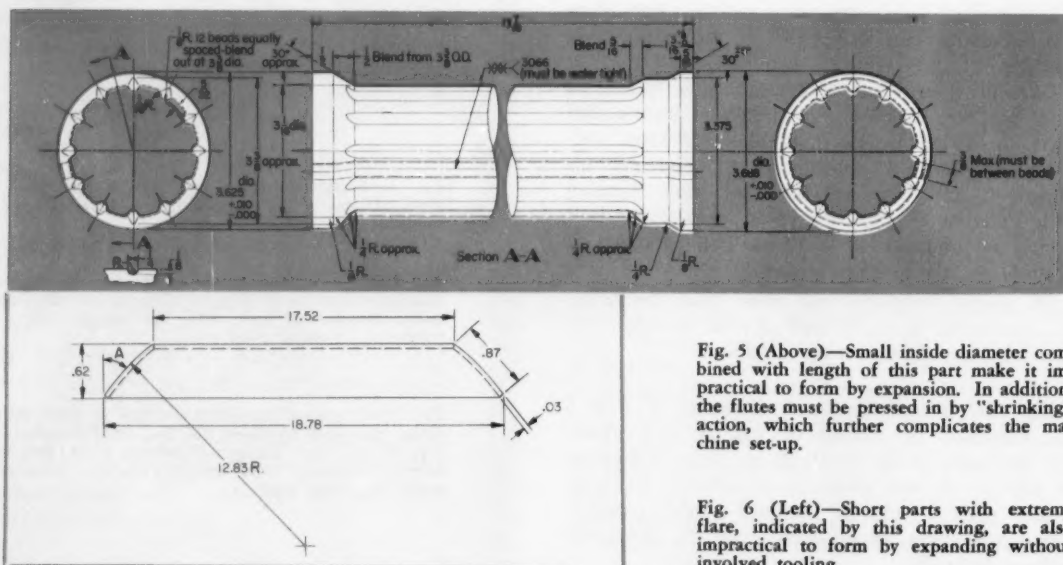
(Above)—Small inside diameter combined with length of this part make it impractical to form by expansion. In addition, the flutes must be pressed in by "shrinking" action, which further complicates the machine set-up.
